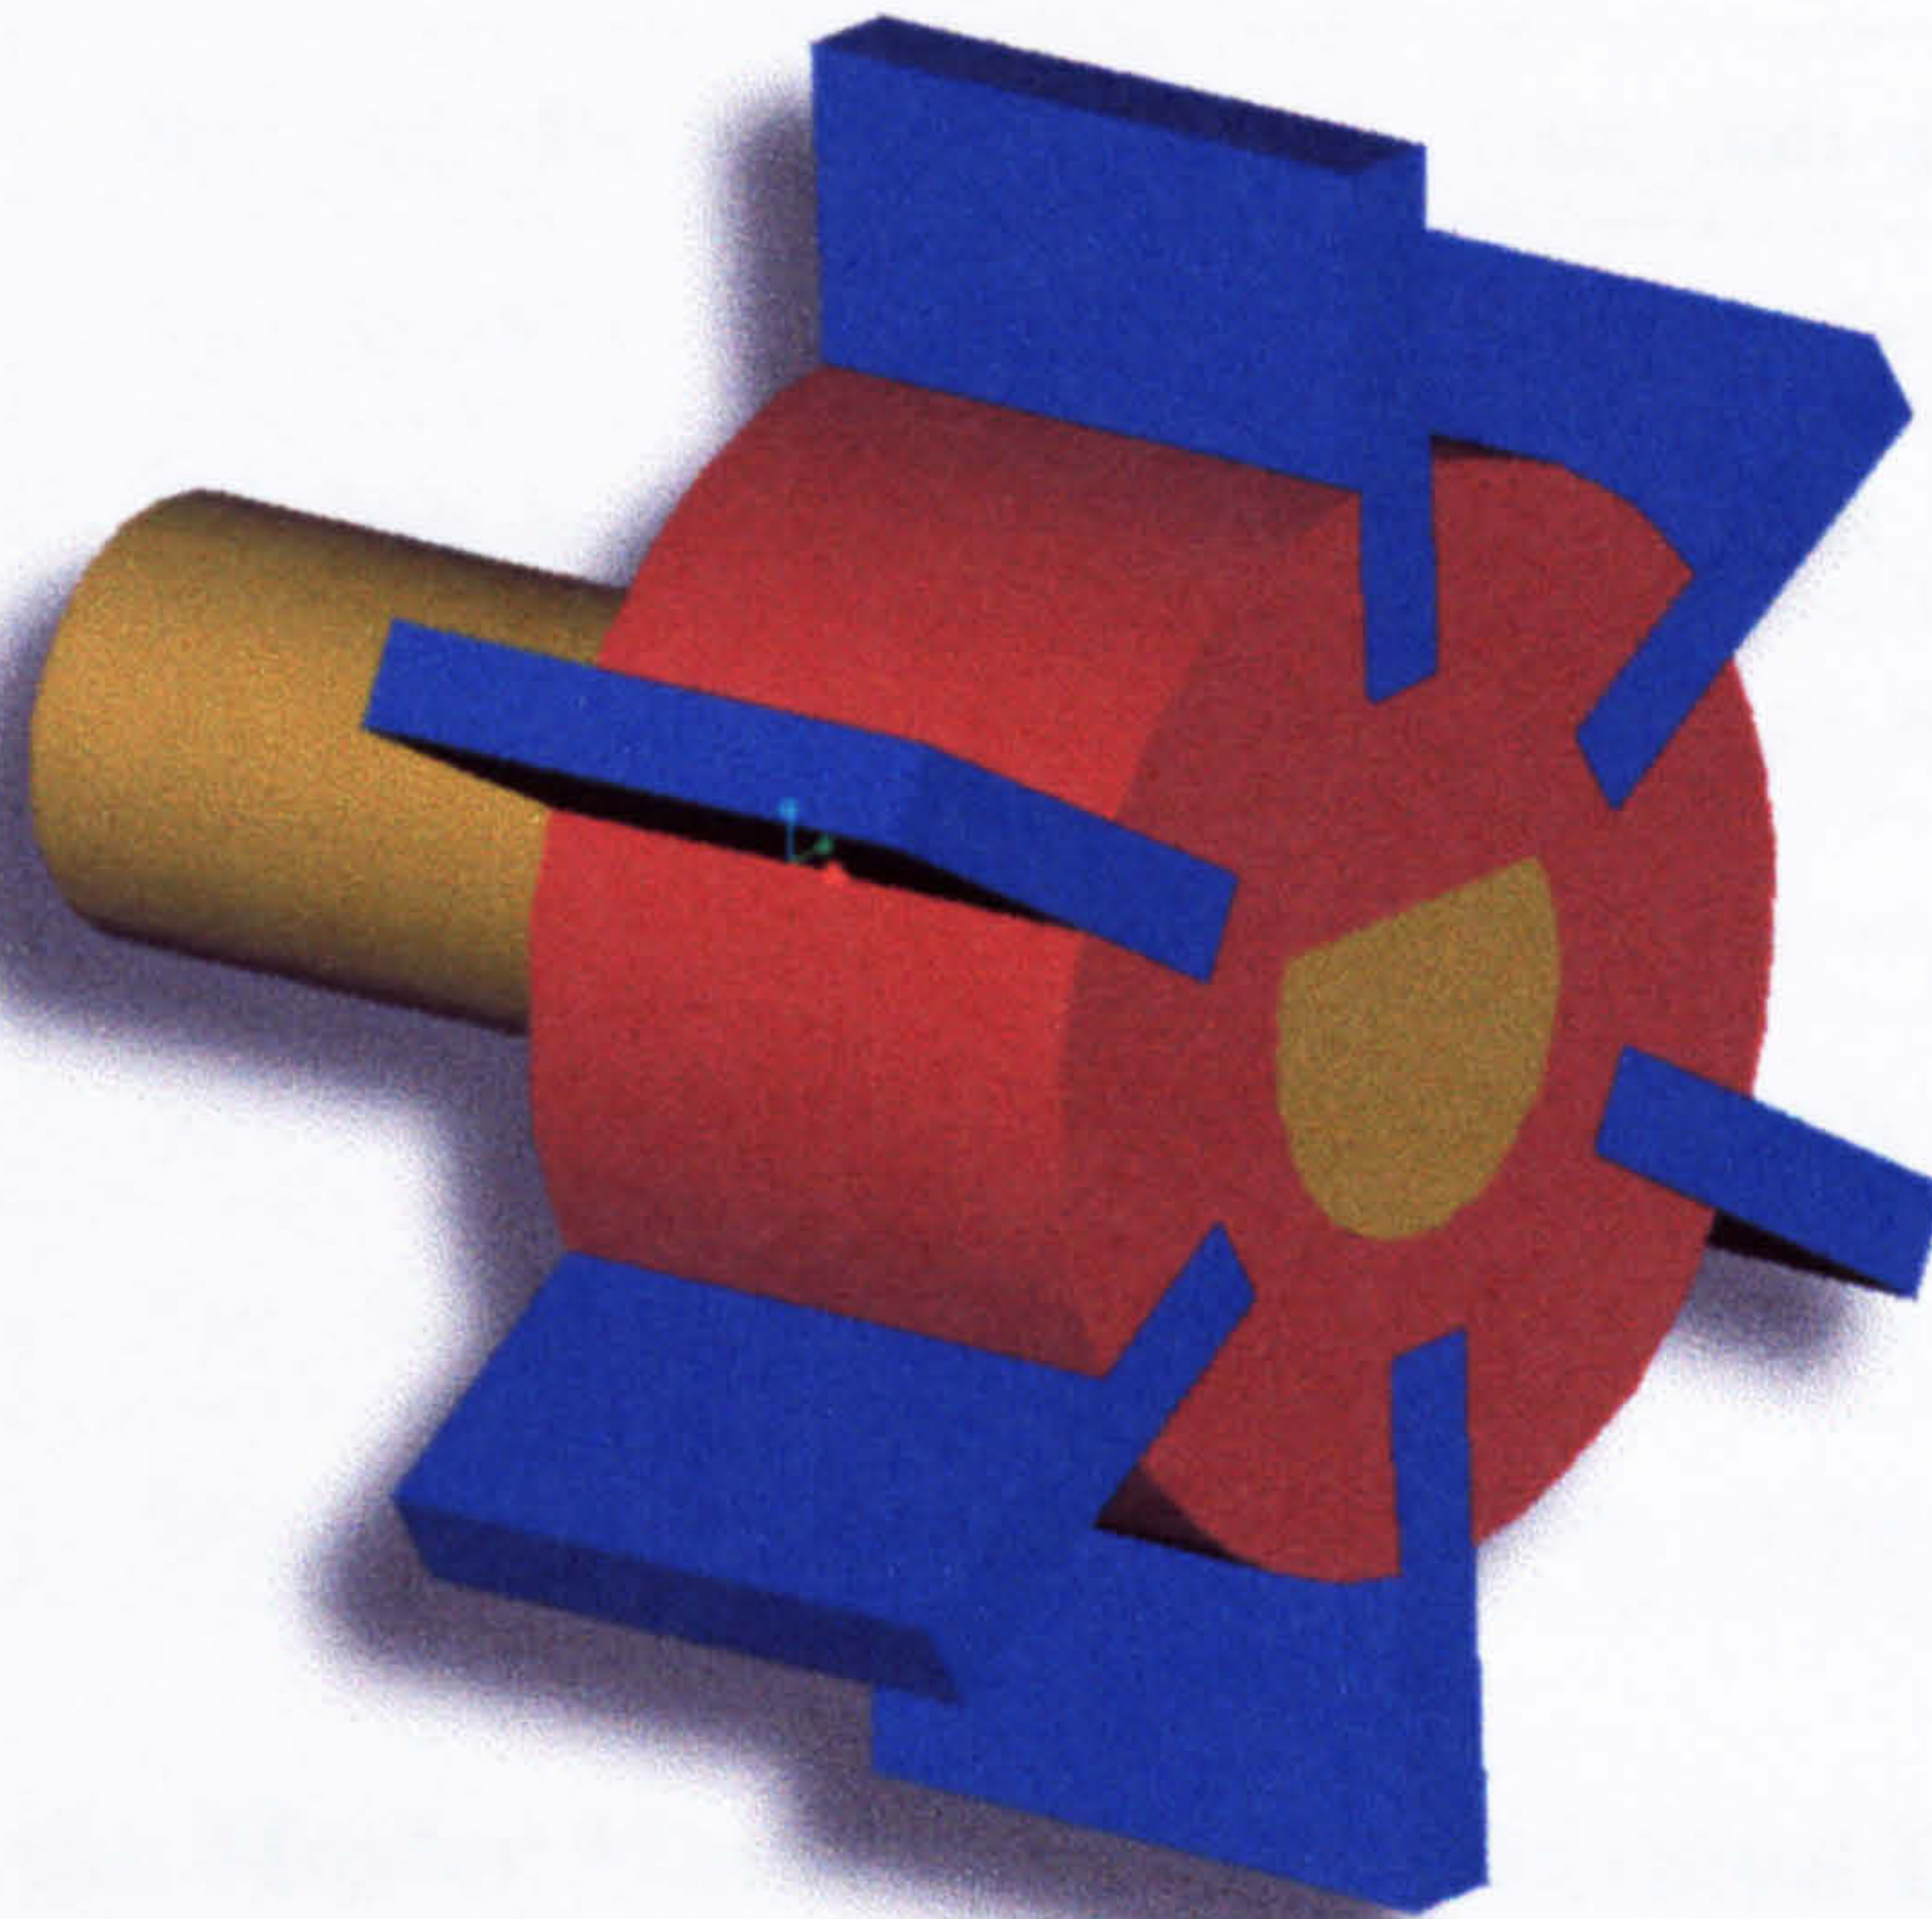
Pro/ENGINEER model of the Prop-Shaft family assembly
